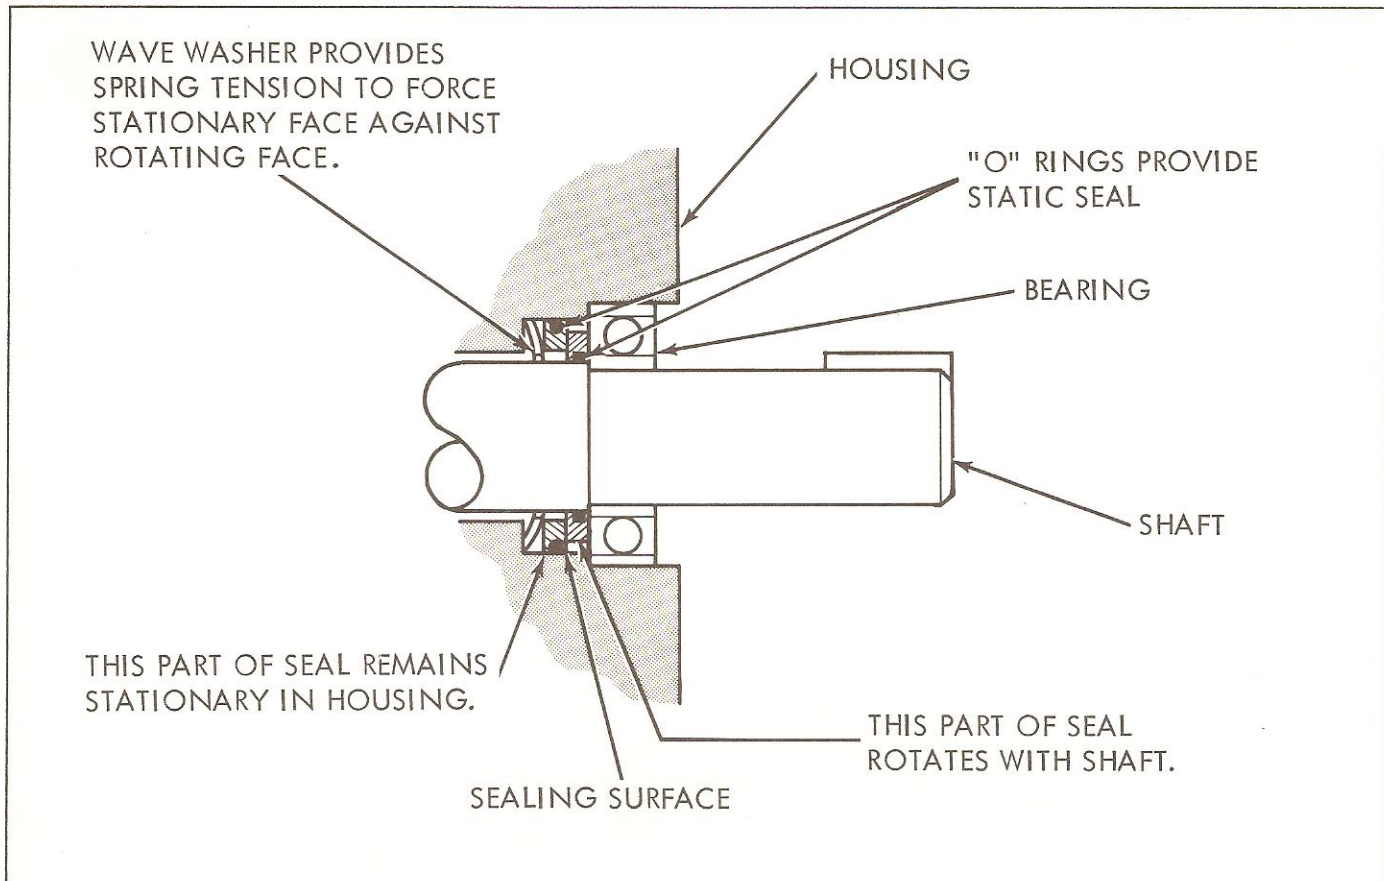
Face Seal for High Pressure Sealing of Rotating Shaft
